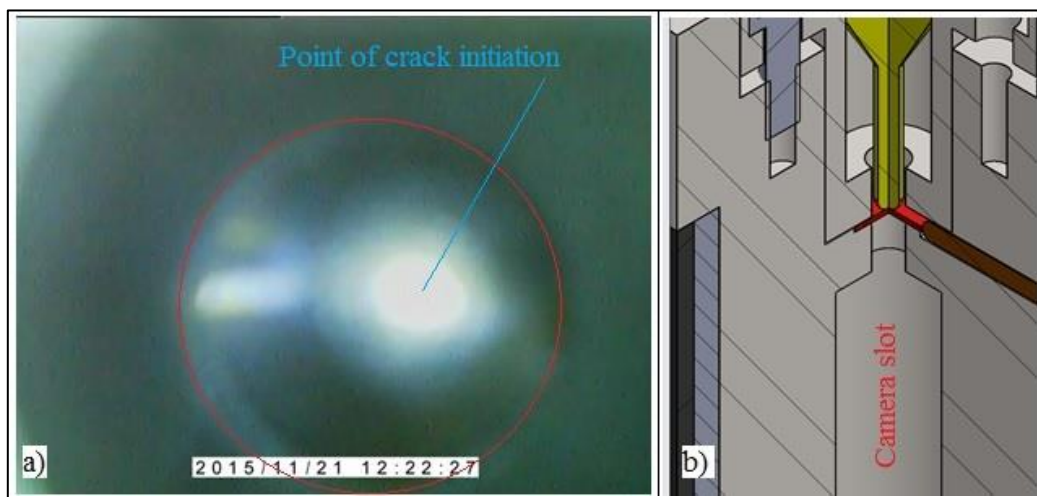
a) Photograph of SPT specimen showing an estimate point of crack initiation recorded by video camera and b) 3D CAD drawing showing the configuration of how the camera is mounted.
